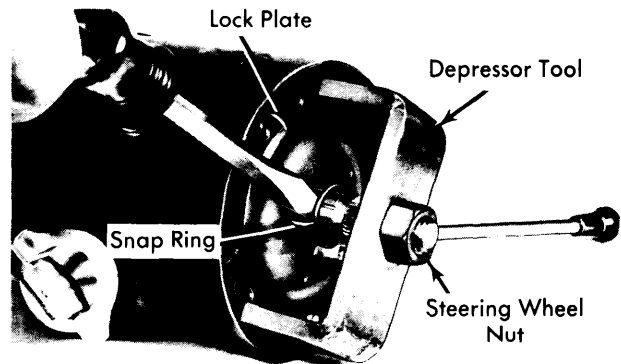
Removing Lock Plate & Snap Ring from Steering Column
